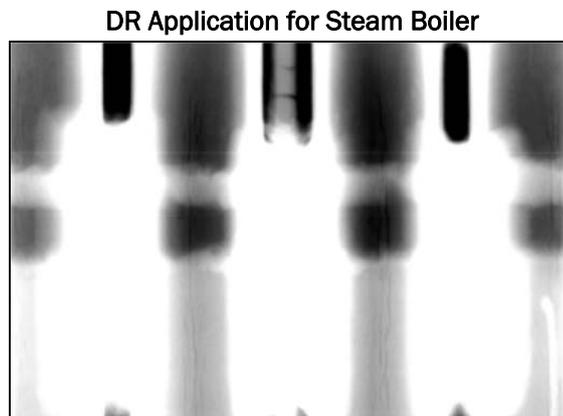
Corrosion fatigue cracking of waterwalls at lower wind box attachments of a steam boiler [WS27]
